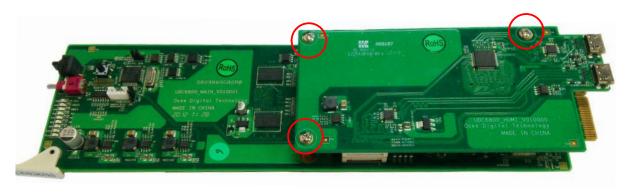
Front View-Installing a HDMI Input/Output Module
